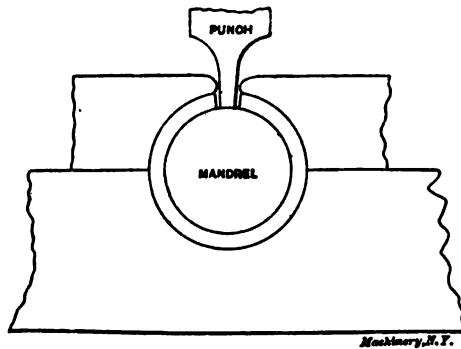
Forming a Bow Spring with Ends which nearly meet
